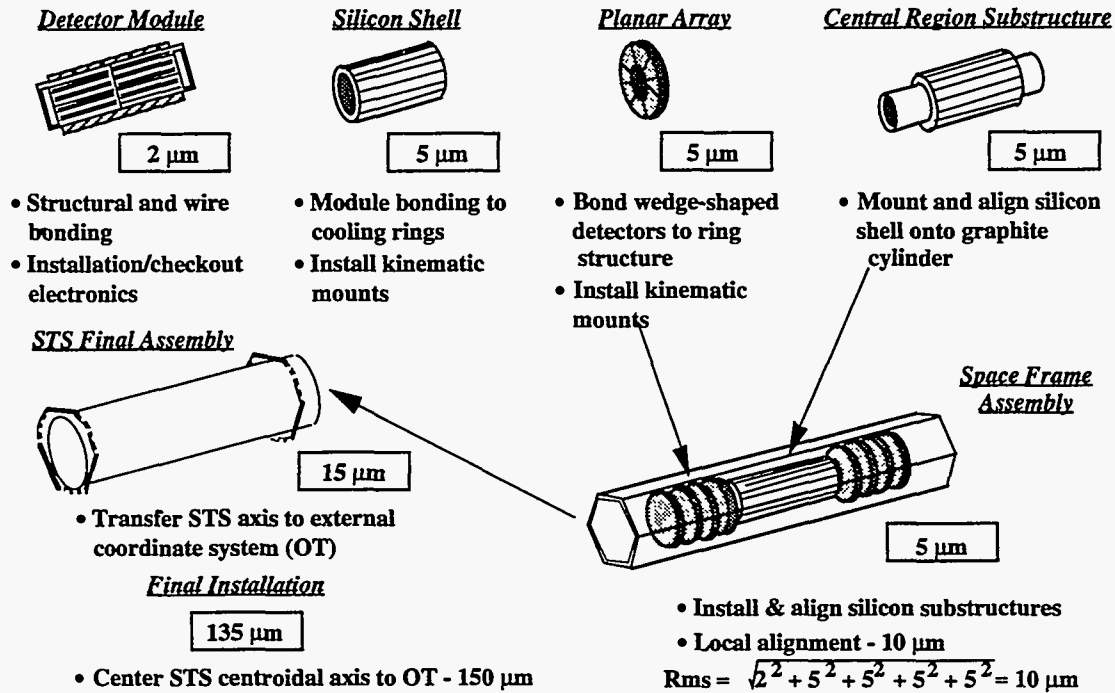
The proposed substructures and the alignment tolerances needed in the individual assembly steps in order to meet the required placement goal of 25 μm.
